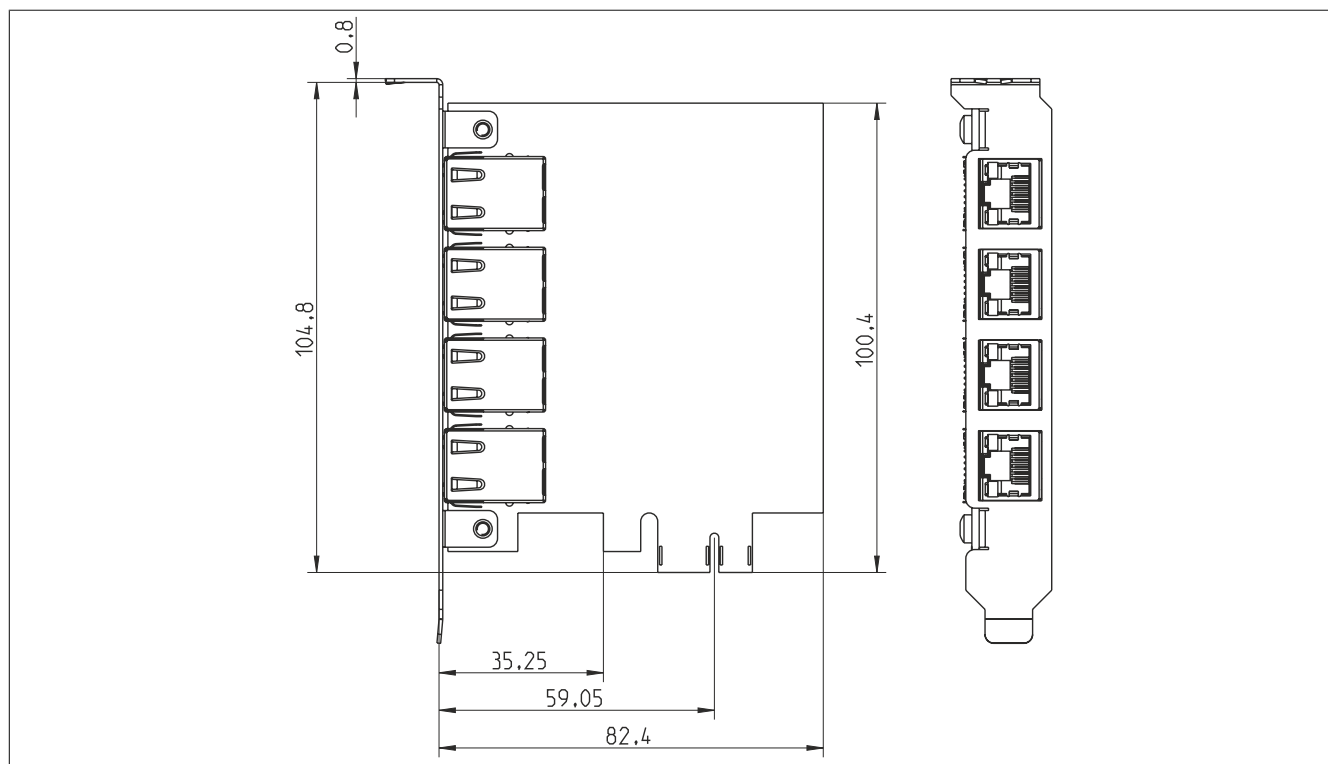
5ACPCE.ETH4-00 - Dimensions
